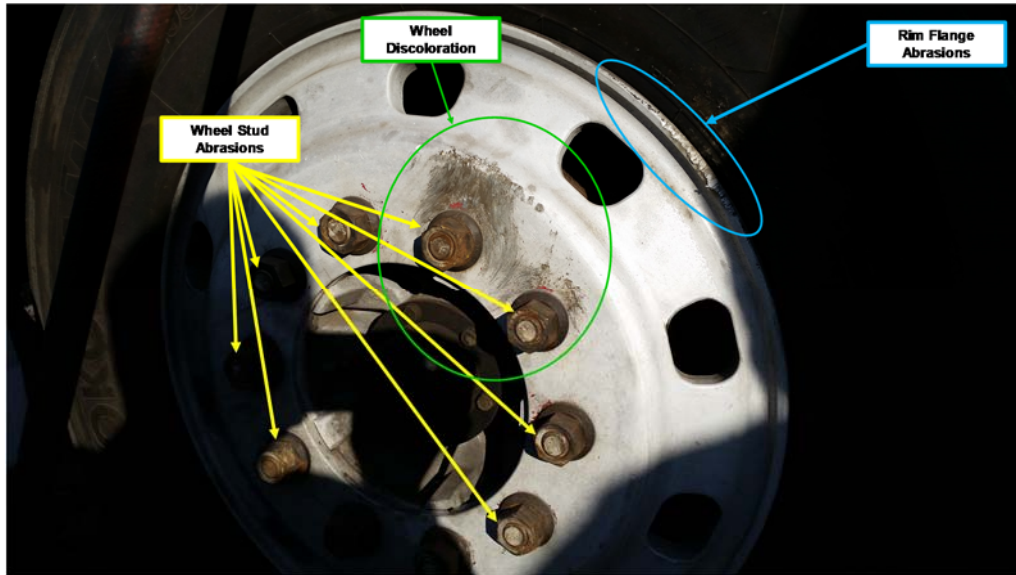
2007 Freightliner Columbia 120 left steer axle wheel and tire assembly.
